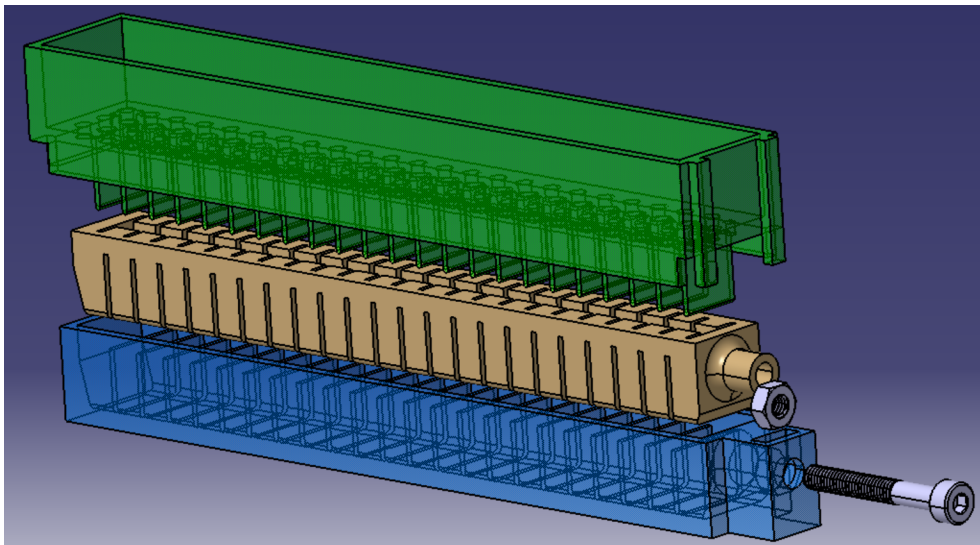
The final design of the PneuNet mold is illustrated in this exploded view, with the green-colored top mold, blue-colored bottom mold, and beige-colored soft actuator all clearly displayed.
